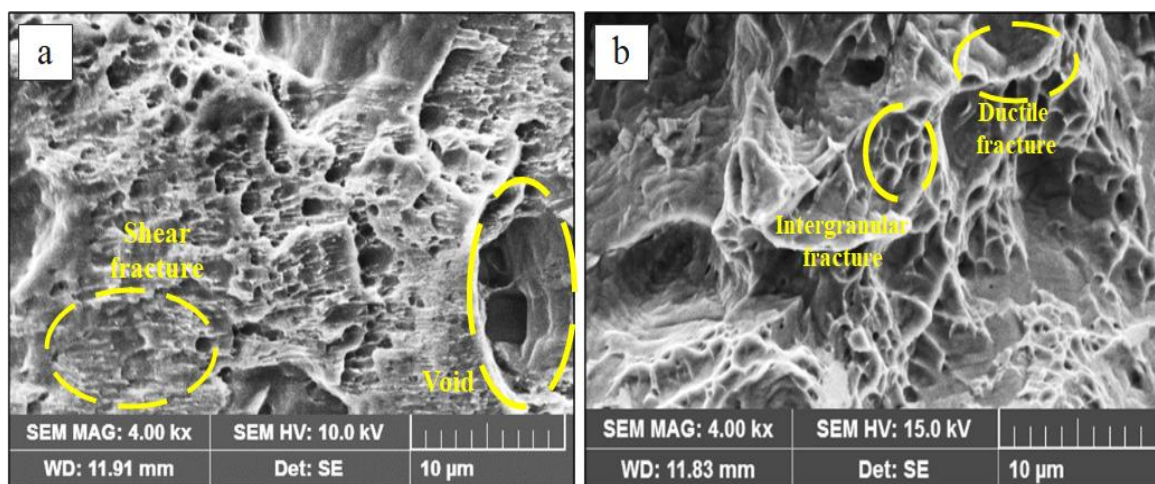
Fracture surface of AA6351 GTA Weld a) as weld b) PWHT
